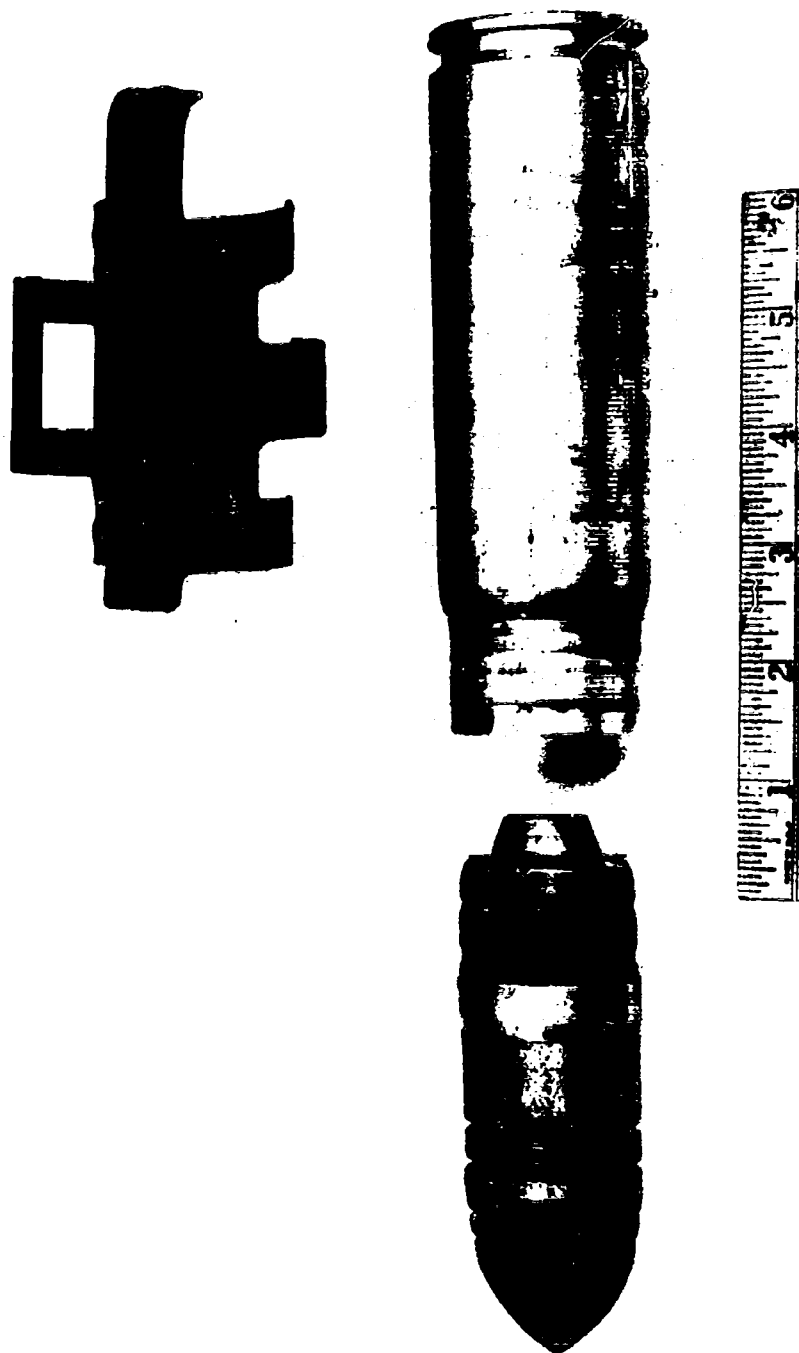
AMMUNITION AND LINK FOR 37MM I DISASSEMBLED
